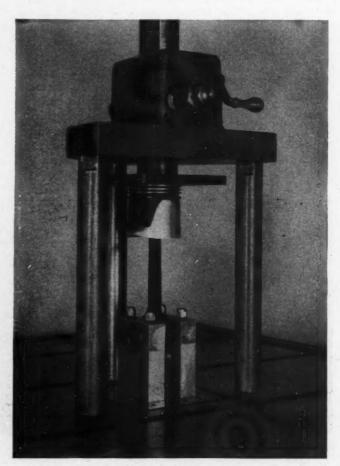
Tension-compression fixture set up to test piston and connecting rod assembly in fatigue
